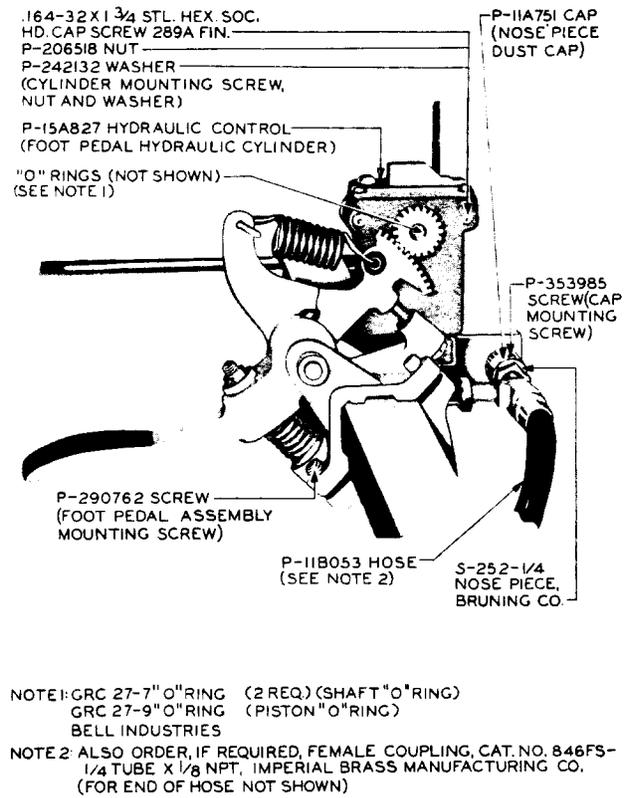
Foot-Pedal Assembly (cover and drip pan removed) — 659A and 659D Tools Only
